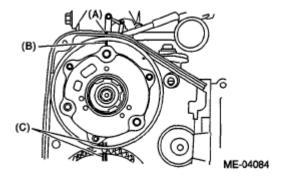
Identifying Single Line And Intake Cam Sprocket RH With Notch Courtesy of SUBARU OF AMERICA, INC.
